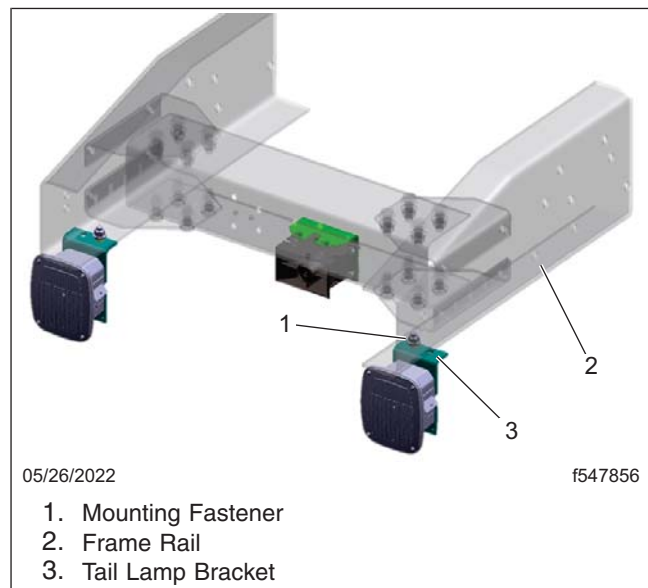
, New Tail Lamp Bracket Installation on the Frame Rail
